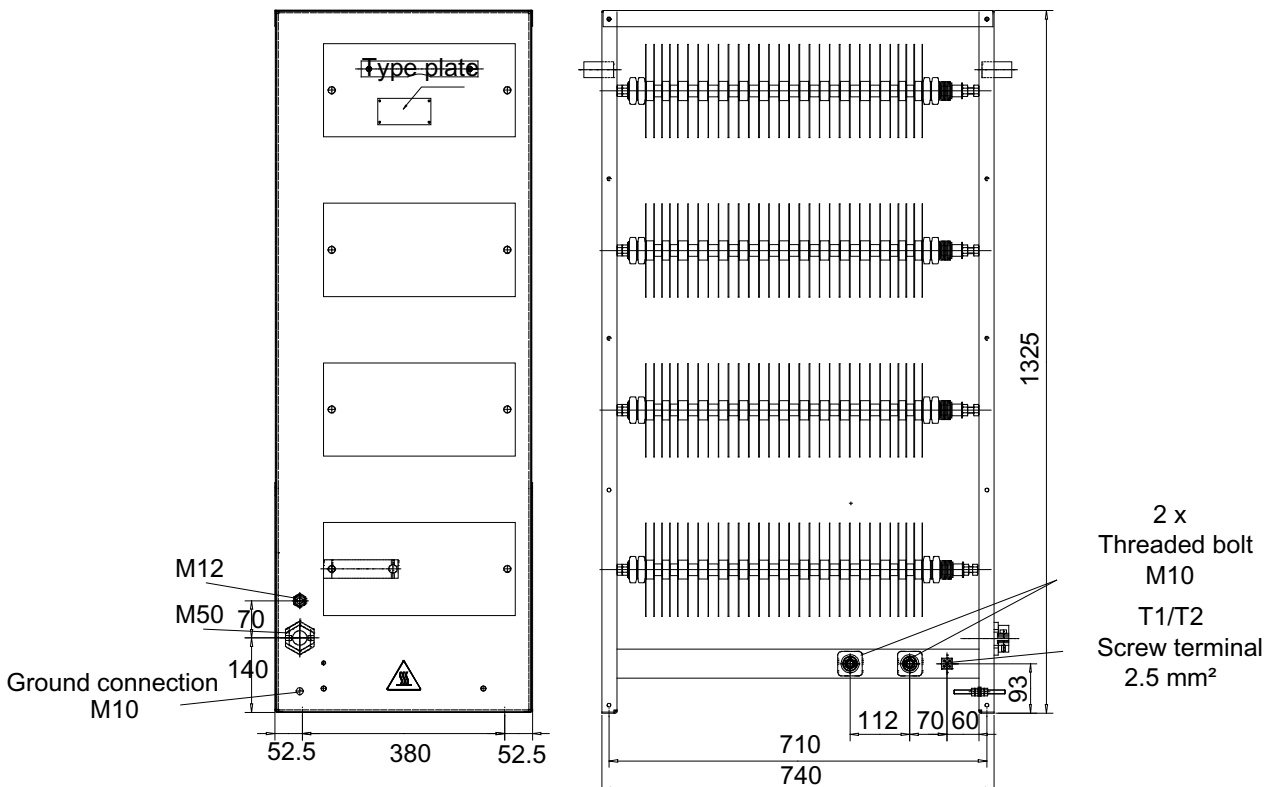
Dimension drawing for braking resistor (50 kW)
